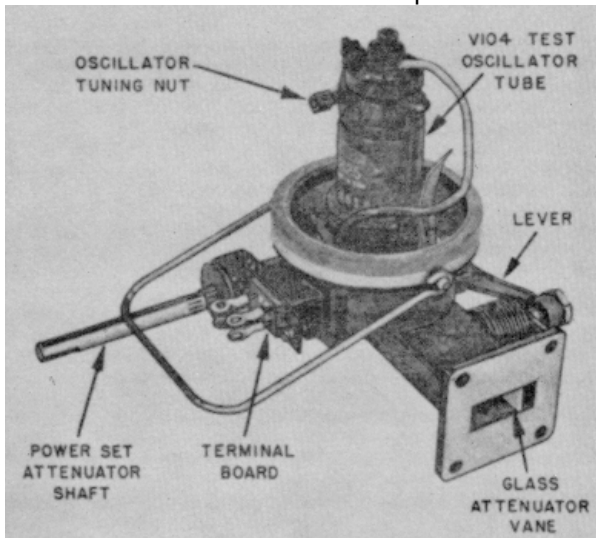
Tube Mount Assembly, Simplified Phantom View
